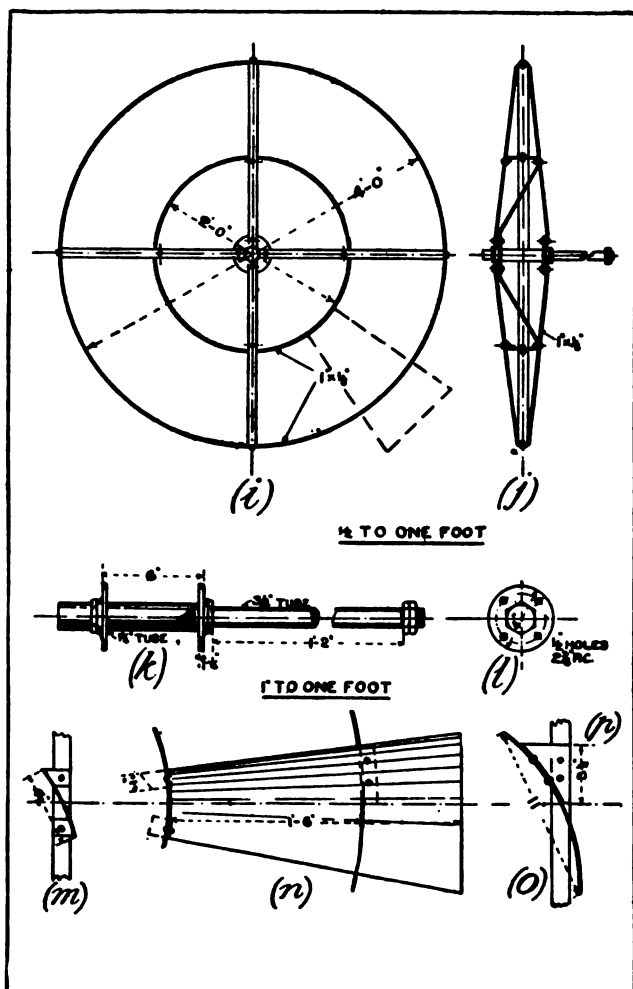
Details of windmill. (i, j) Frame; front and side views. (k, l) Axle of wheel. (m) Attachment of inner end of vane to inner ring of frame. (n) Vane on rings. (o) Attachment of vane to outer brackets by bracket (p).
